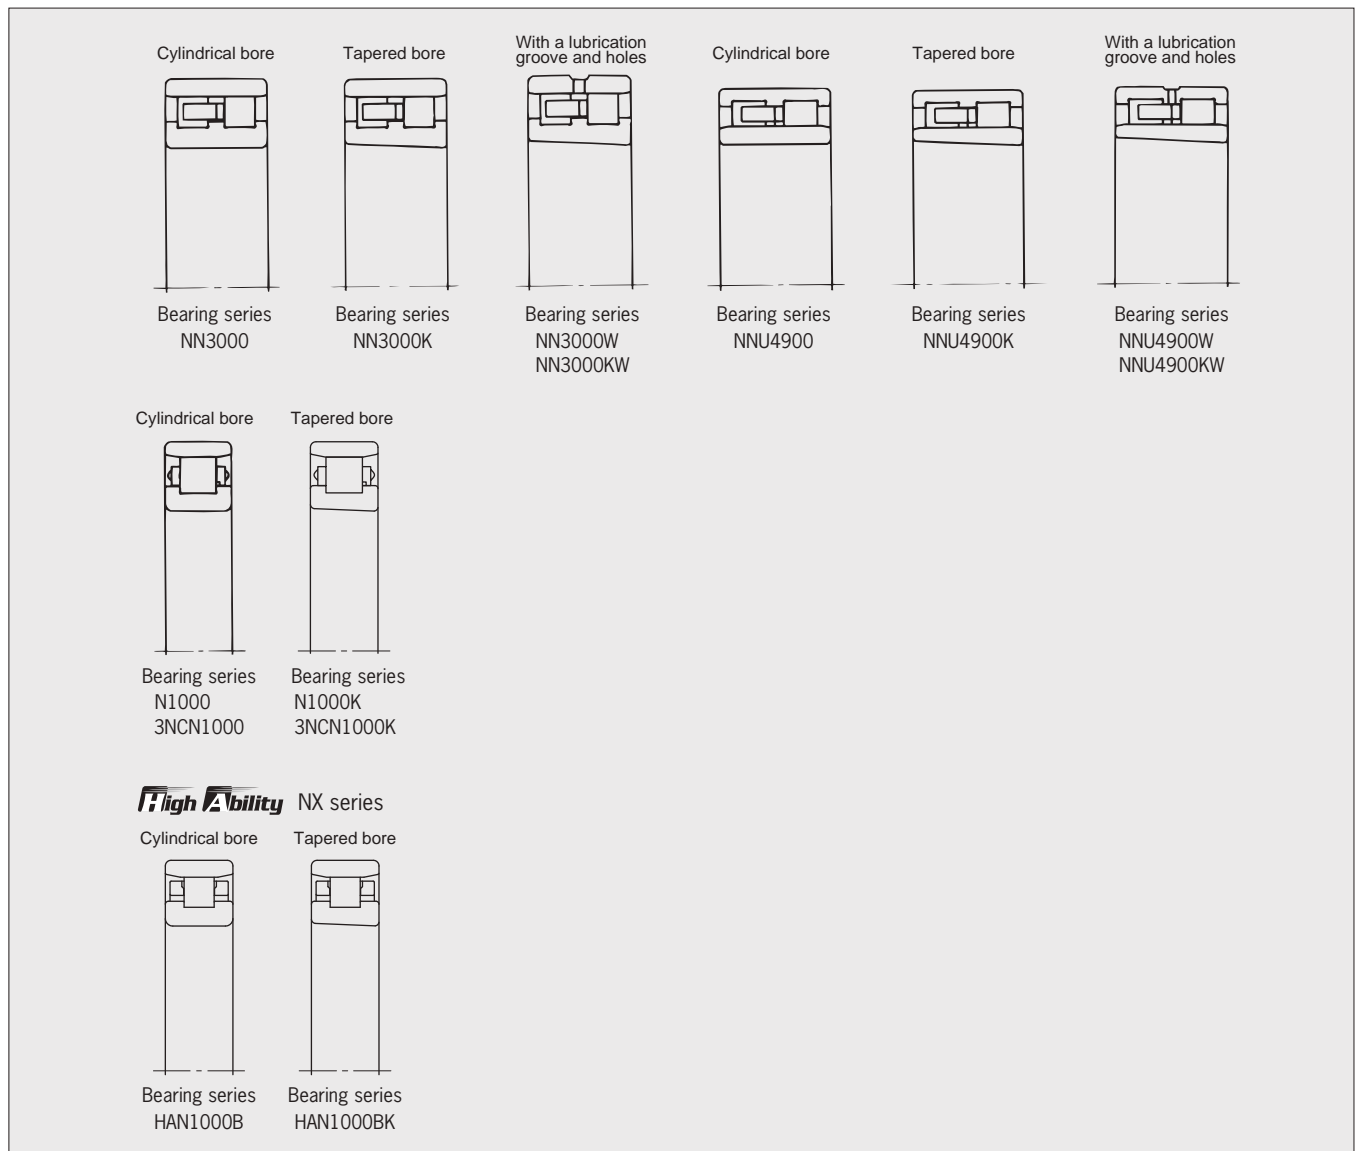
1 Types and series of cylindrical roller bearings for machine tool spindles
